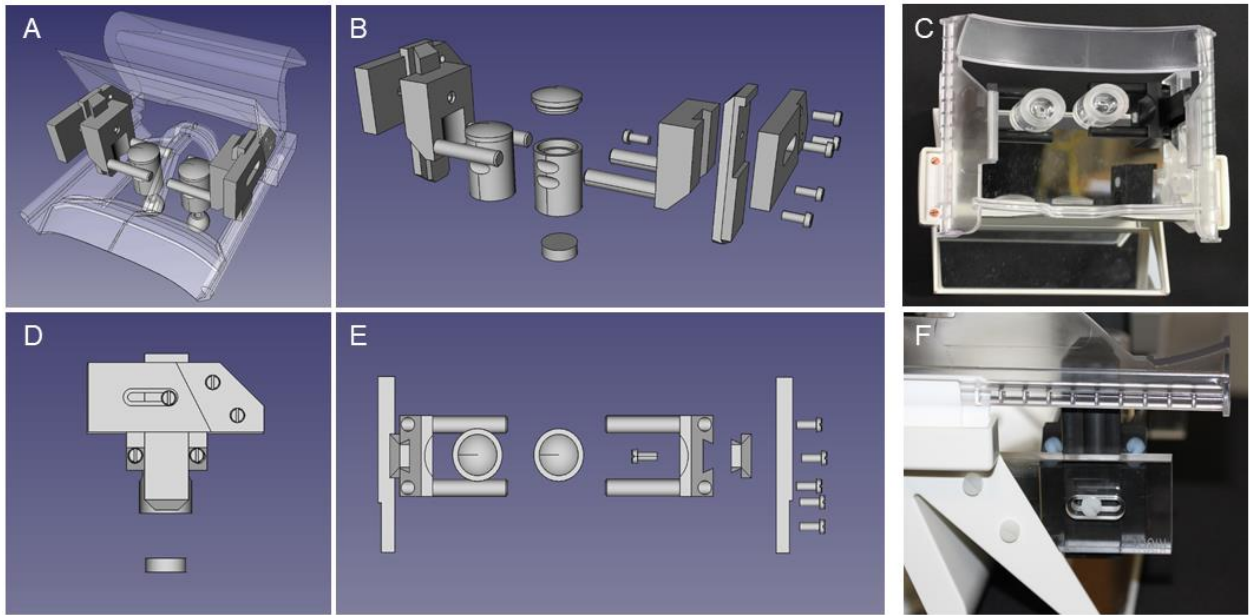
Mount assembly (A) Perspective view showing mounting location within mirror structure. (B) Exploded component perspective view showing component assembly. (C) Real world view from below. (D) Isometric side view showing assembled plates and screws. (E) Exploded components isometric view from below showing component assembly. (F) Real world side view.
